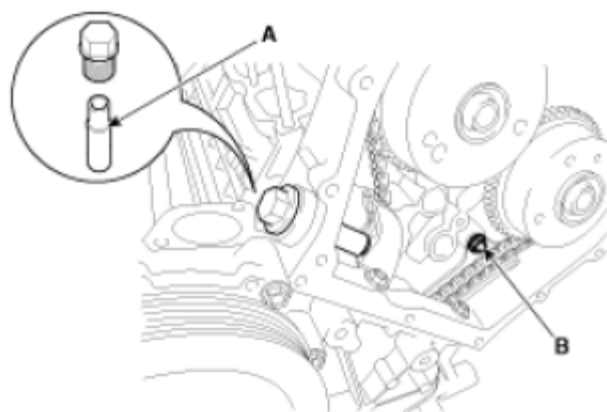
Identifying Timing Chain Tensioner And Chain Guide Fixing Bolt
